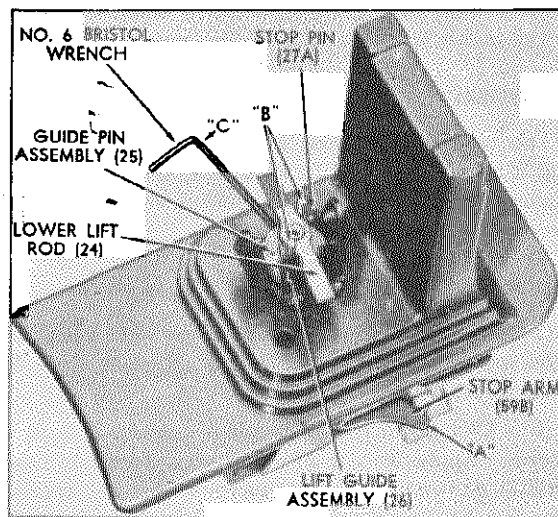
RE-POSITIONING GUIDE PIN ASSEMBLY
